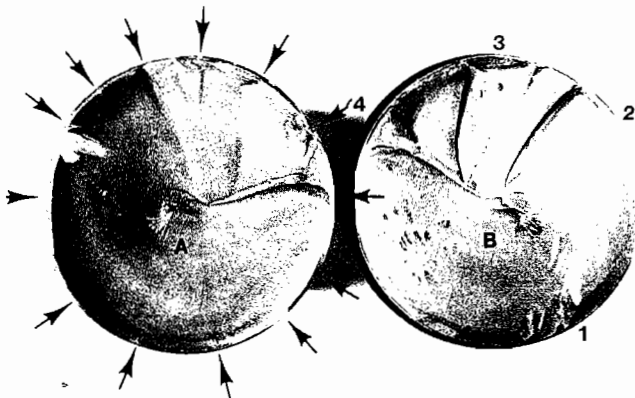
Multiple Origin Fatigue Fracture of a Pump Shaft. Arrows show locations of the many fatigue crack origins. "A" and "B" are corresponding final fracture zone of each fracture face.
